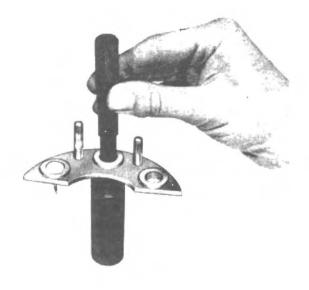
Removing Rectifi "s from Heat Sinks.
